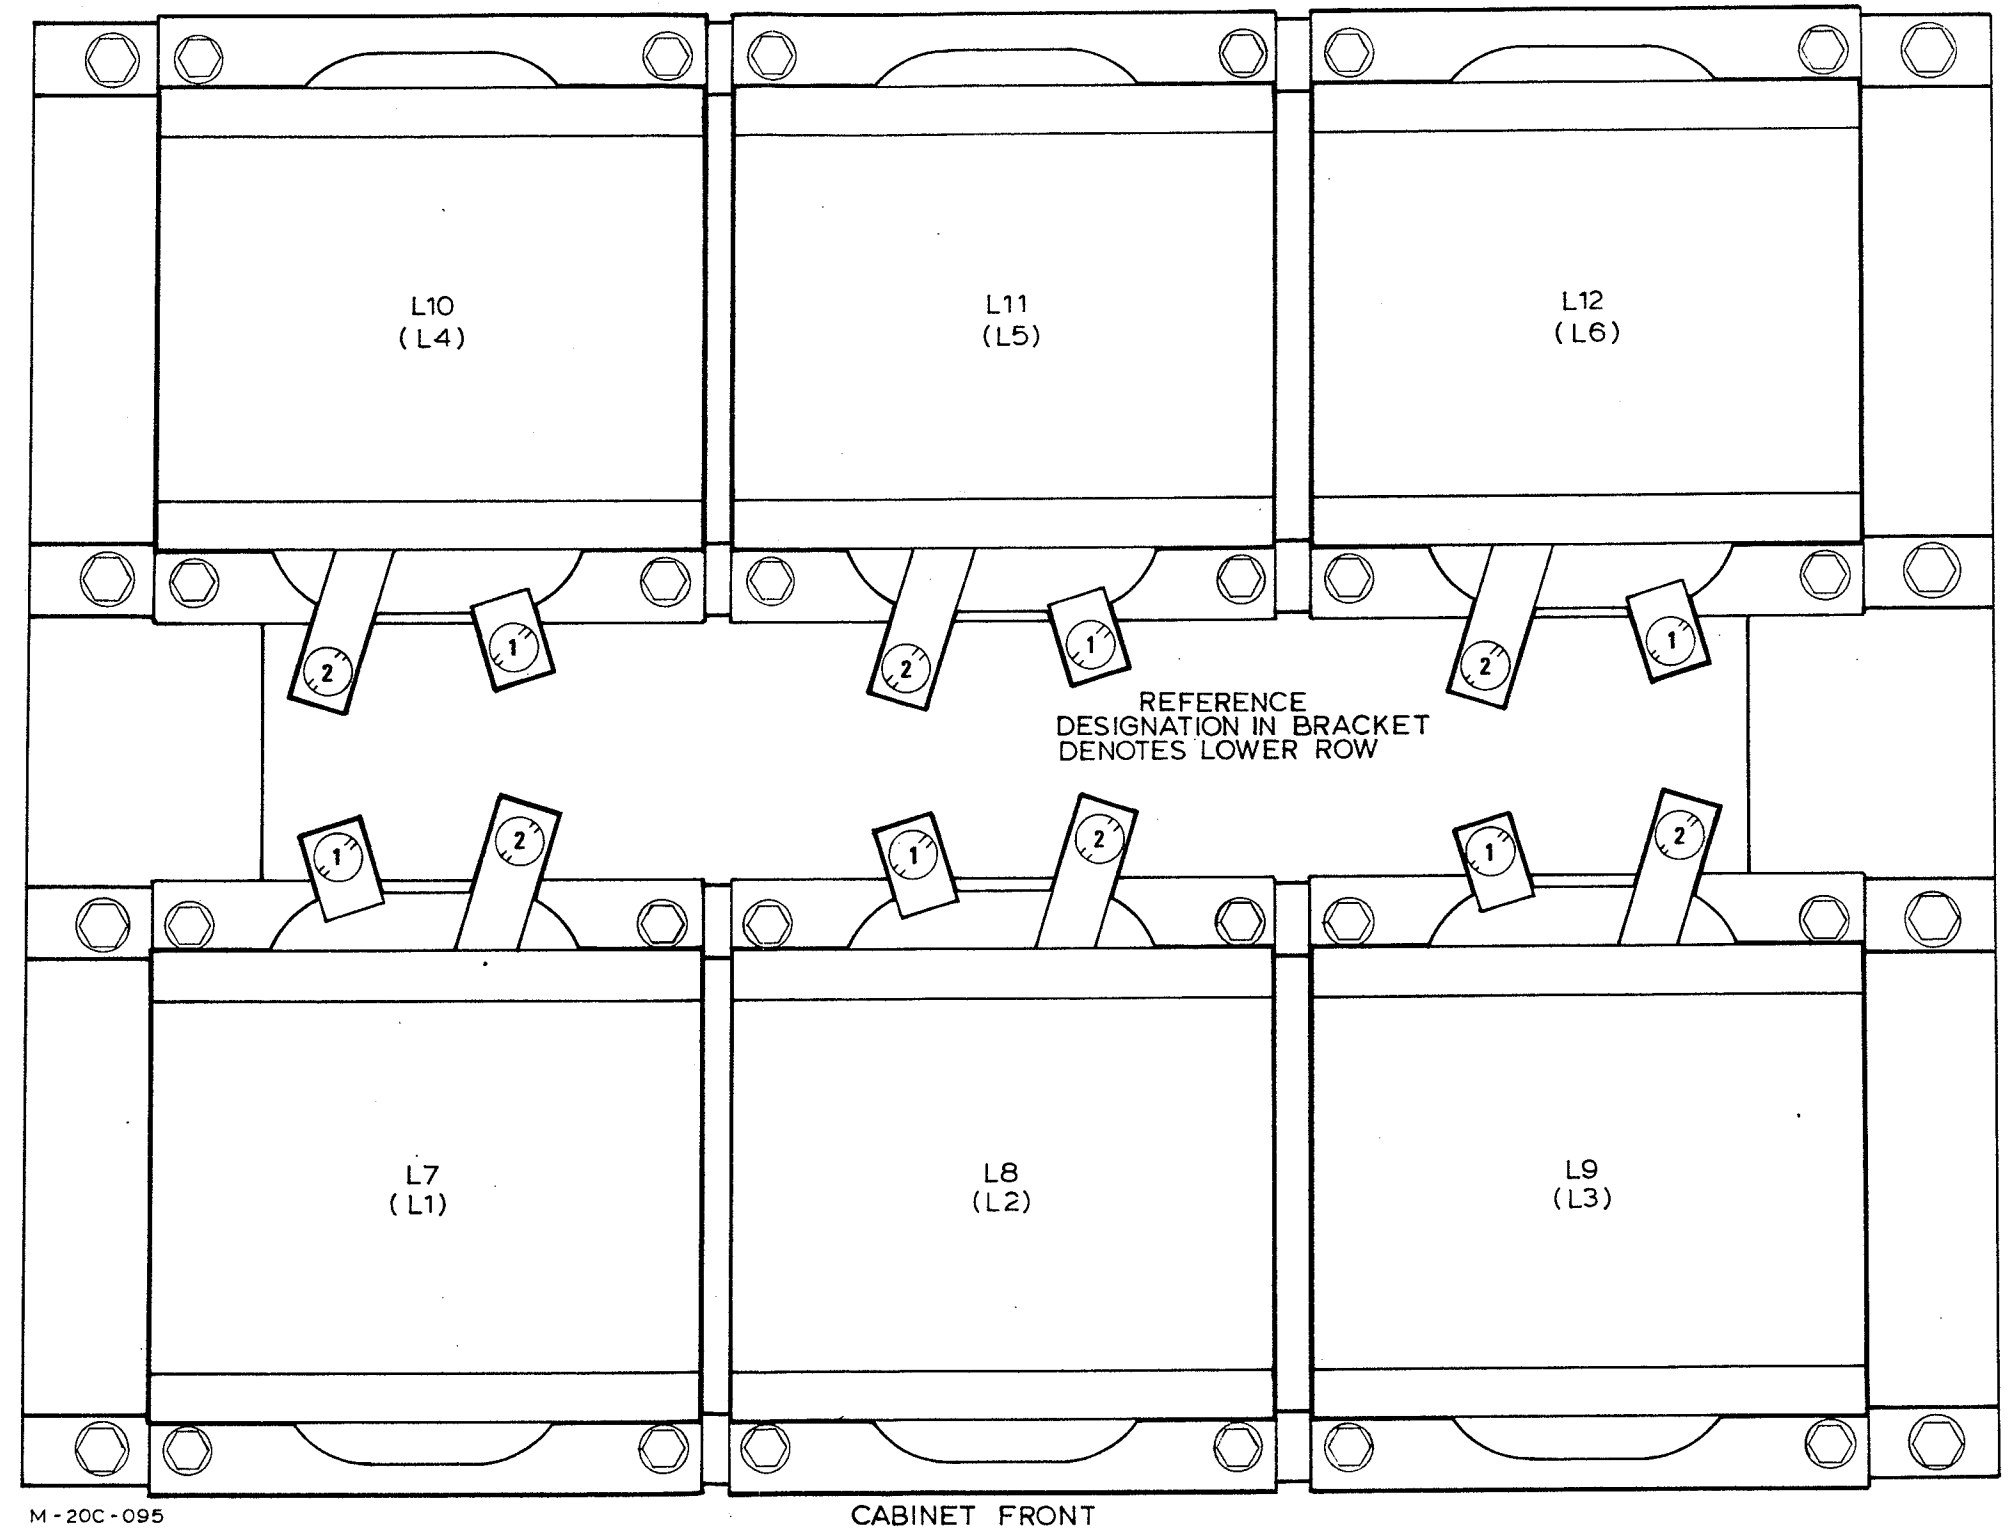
Assembly Detail - -72 Vdc Choke Tray (Top View)
